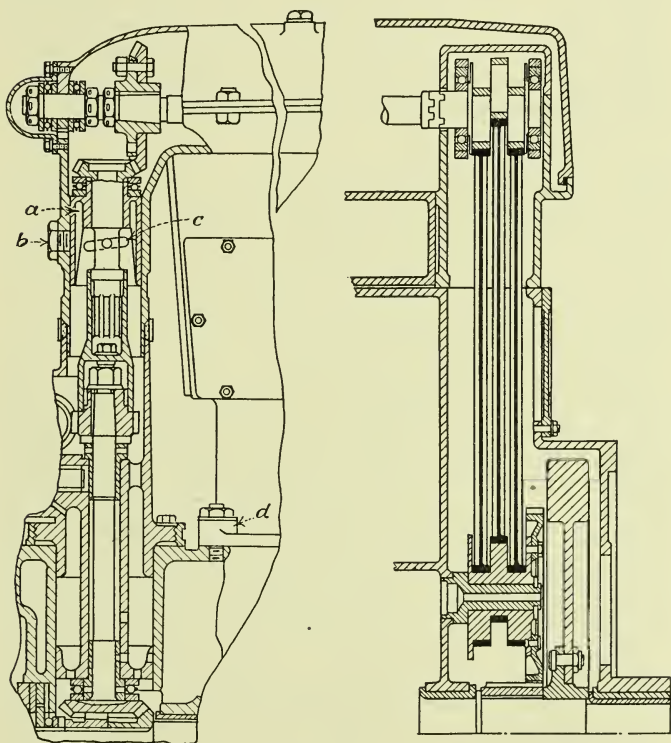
AT THE LEFT THE CAMSHAFT DRIVE USED ON THE BENTLEY ENGINE AND AT THE RIGHT A SOMEWHAT UNUSUAL FORM OF CAMSHAFT DRIVE THAT IS USED ON THE LEYLAND STRAIGHT-EIGHT ENGINE
